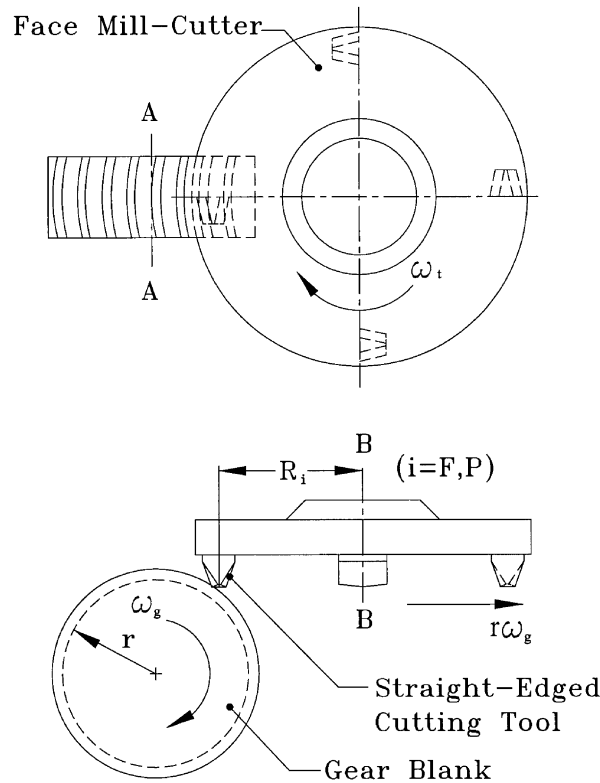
Generating mechanism for curvilinear-tooth gears.
